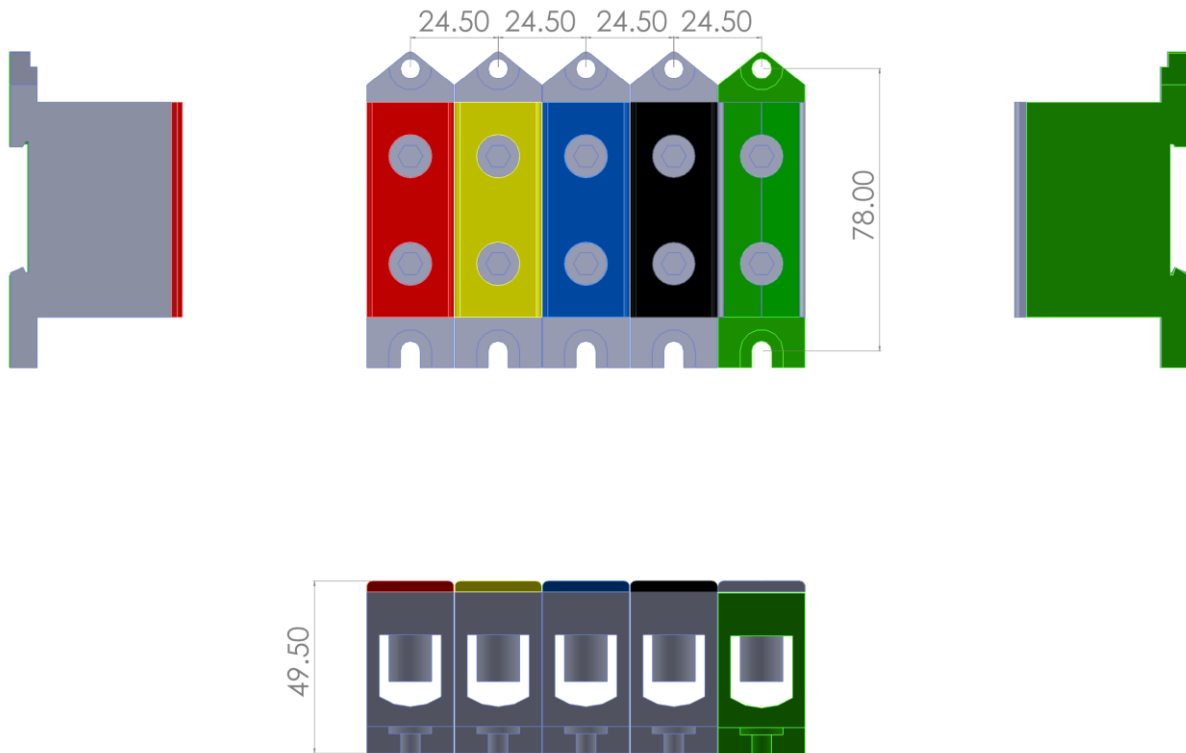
Perspective Drawing of Outgoing (Consumer) Terminal Block Assembly
